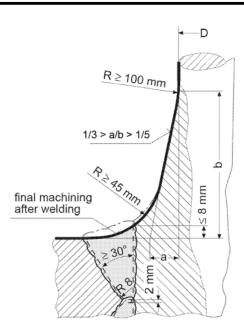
Welded joint between rudder stock and coupling flange
